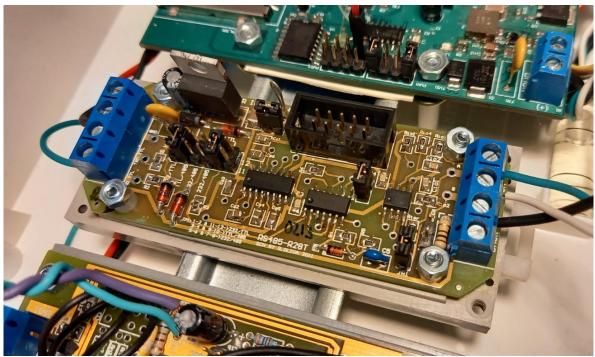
Detail of hand-assembled DIN-RS485 board operating in TTL to RS485 Mode, connecting METEO to CL3, and mounted on a DIN R-28T plastic base
